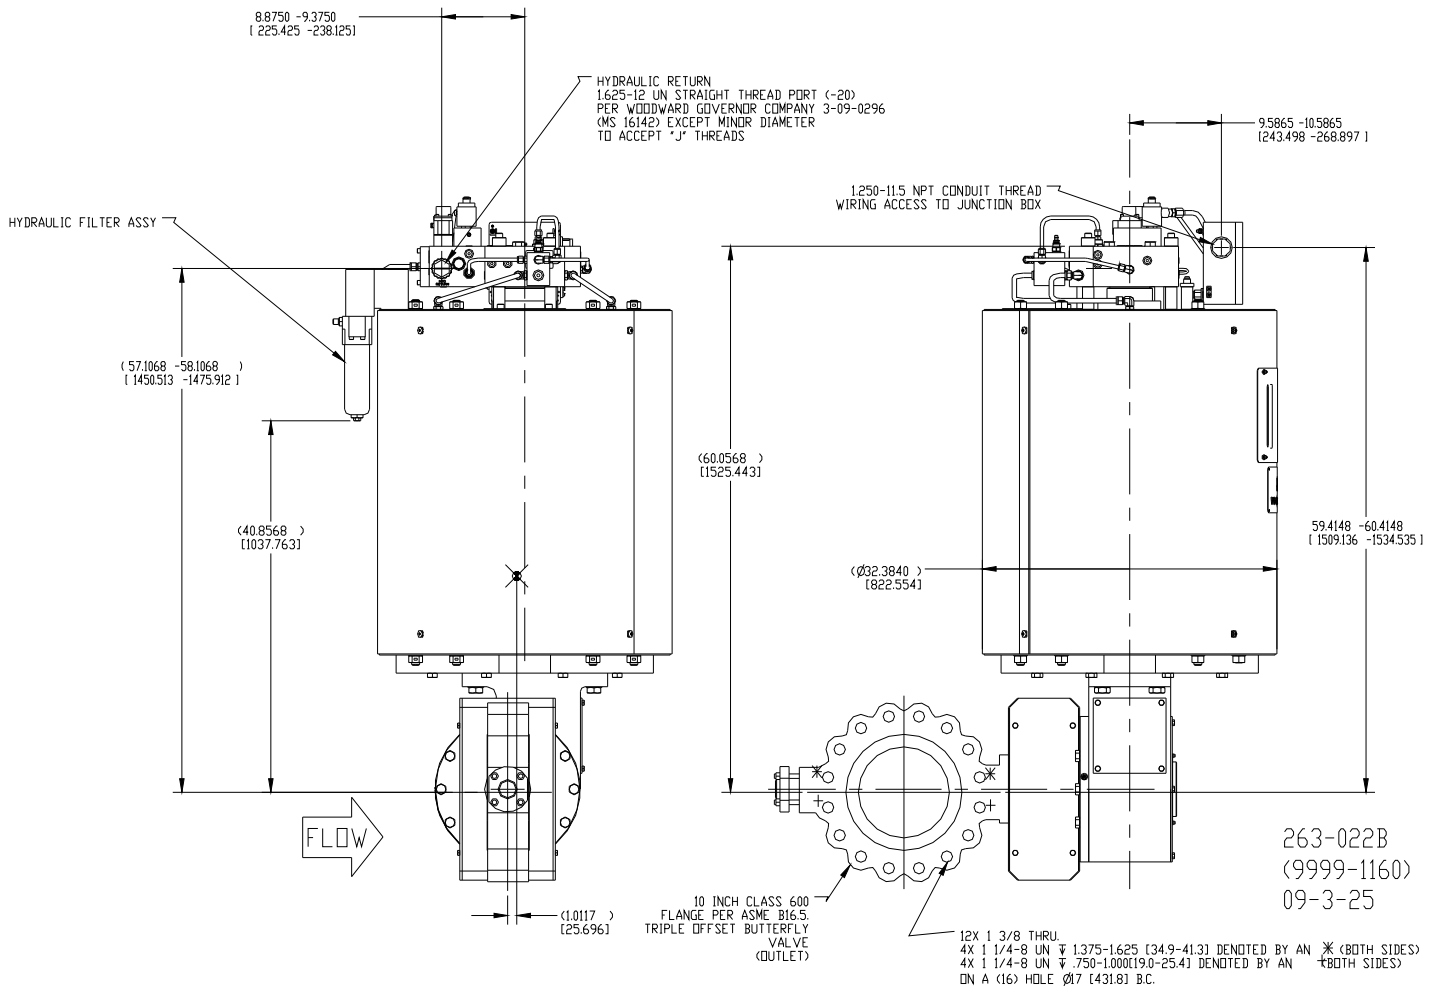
Outline Drawing, 10" valve (9904-914, -915)
